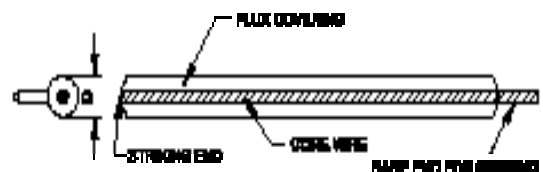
SMAW Electrode During Welding
